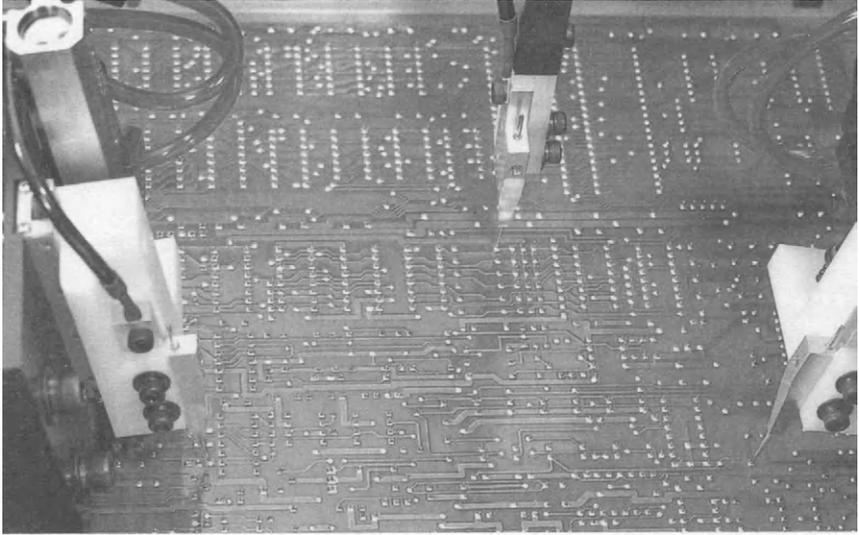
Close-up of APT-2200N fixtureless tester, using moving probes to test unassembled printed circuit board (Contax)
